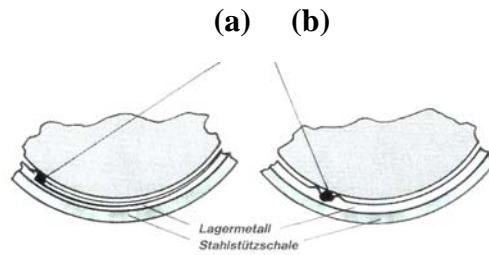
The pattern of the damages of the sliding surface bearings caused through strange bodies: (a) pumps through grains and the rifling of the sliding surface, (b) polishing shaft neck through grains fixed in the sliding layer [14]
